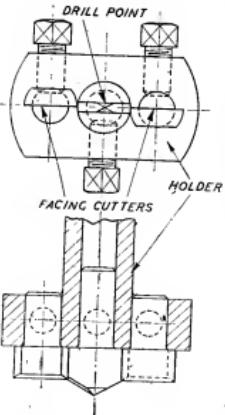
A combined centring and facing tool holder for inserted cutters.
